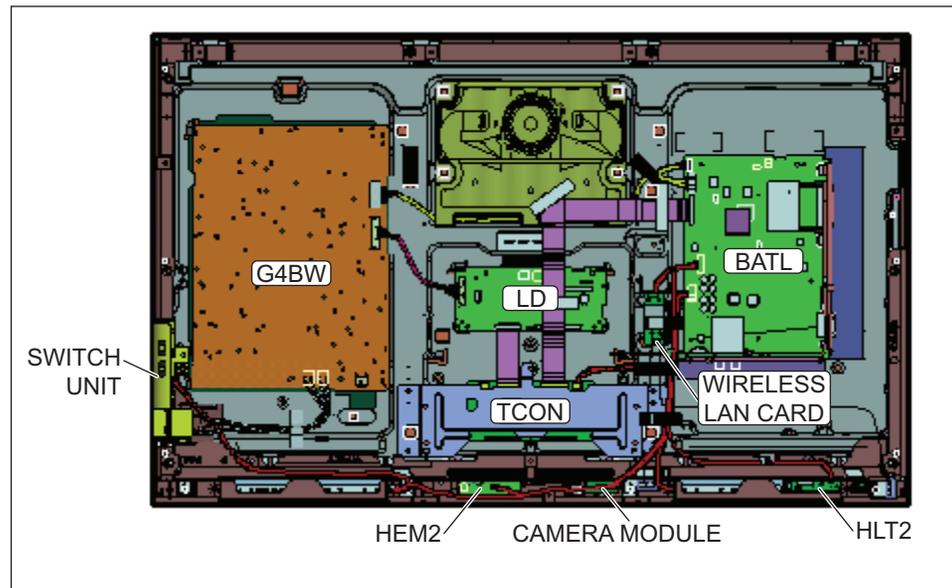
BOARD LAYOUT FOR KDL-40NX720 ONLY
